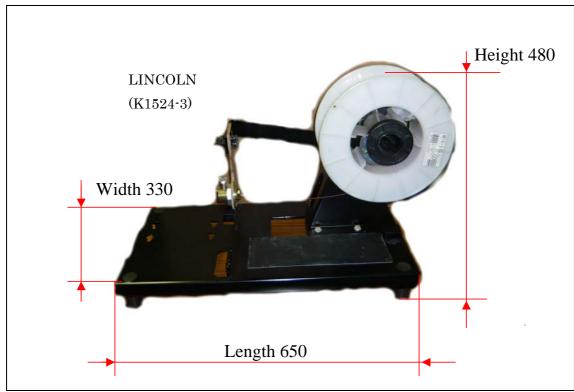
(i) Dimension of wire reel stand (A05B-1291-J201)
